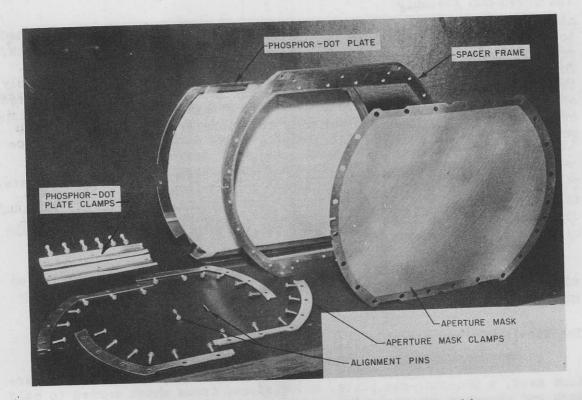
Exploded View of Viewing-Screen Assembly.
